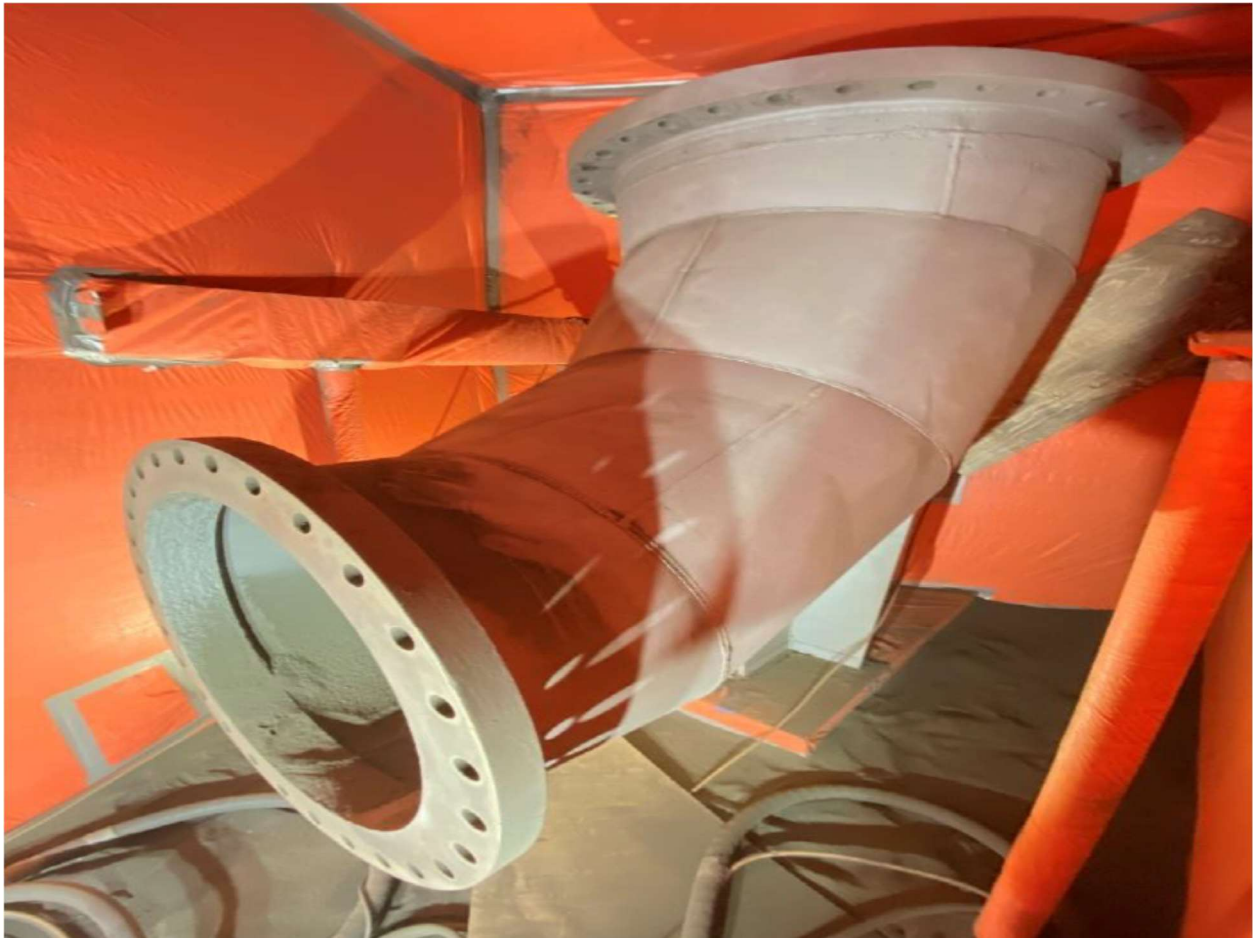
Exterior Surface after the Sand Blasting to Remove Coating
